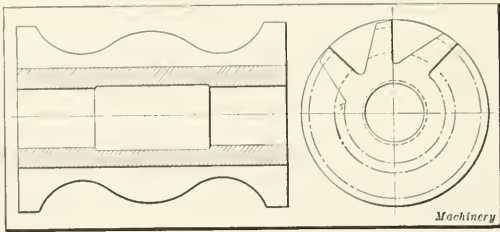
Milling Cutter for producing Thre-tooth Impeller of 4 inches Pitch Diameter
